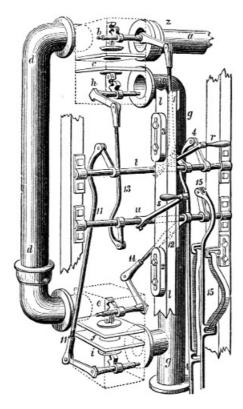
Valve-Gear of the Albion Mills Engine.
